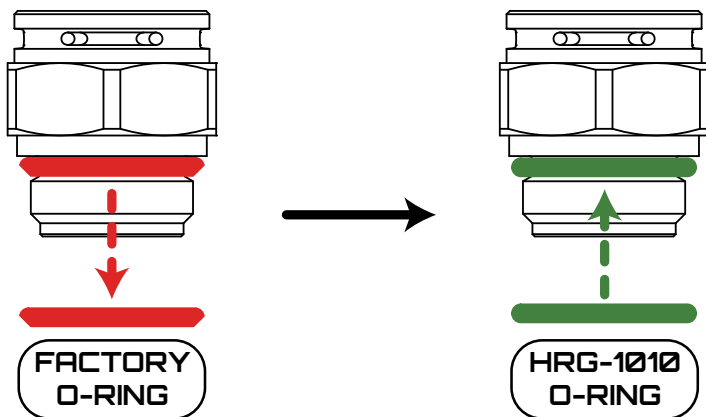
Installing the HRG-1010 Replacement O-Ring on Factory Fitting
